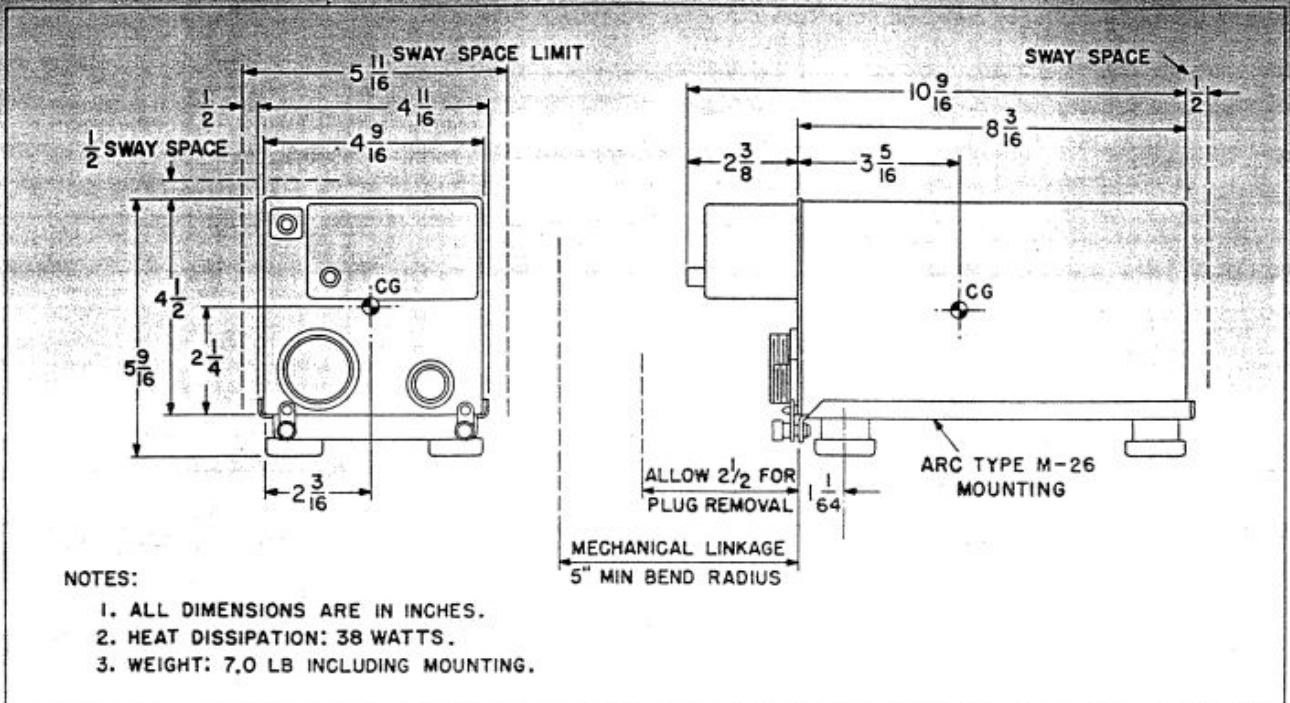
ARC Type R-30A Receiver with ARC Type M-26 Mounting, Outline Dimensions
